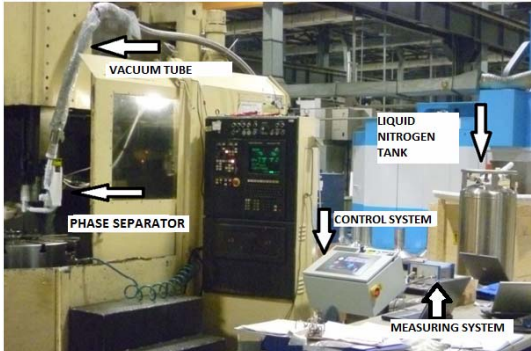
Cryogenic cooling set-up on a VTN10 CNC vertical lathe in TEI [17]
